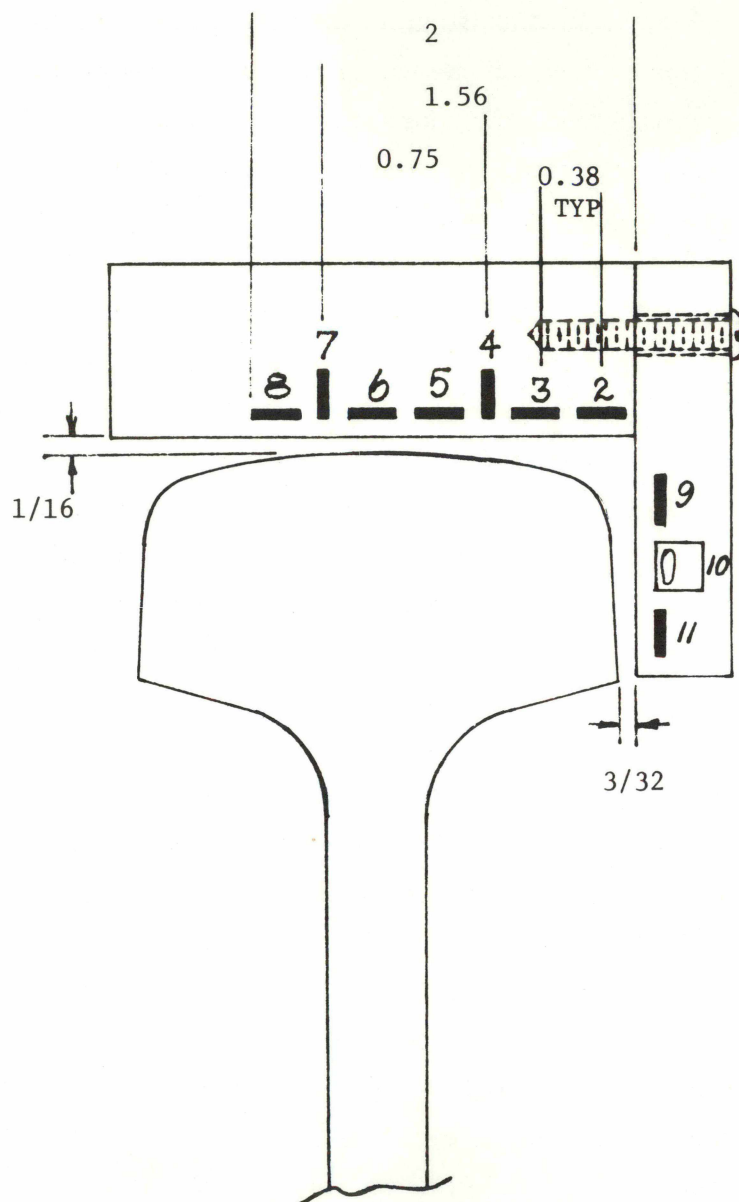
LAYOUT OF HALL ELEMENT SENSORS
